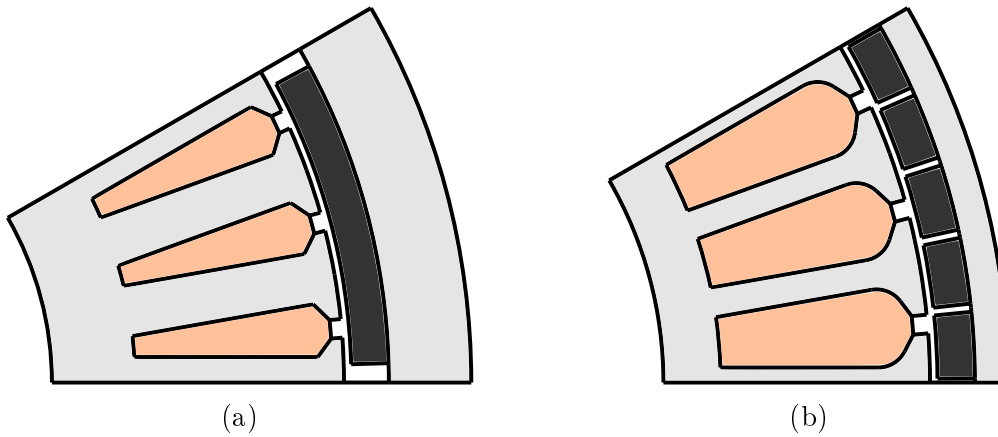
Teeth and magnets detail (a) 3612 MkI SPM Motor with overlapped winding (b) 3660 MkI Vernier Machine with overlapped winding
